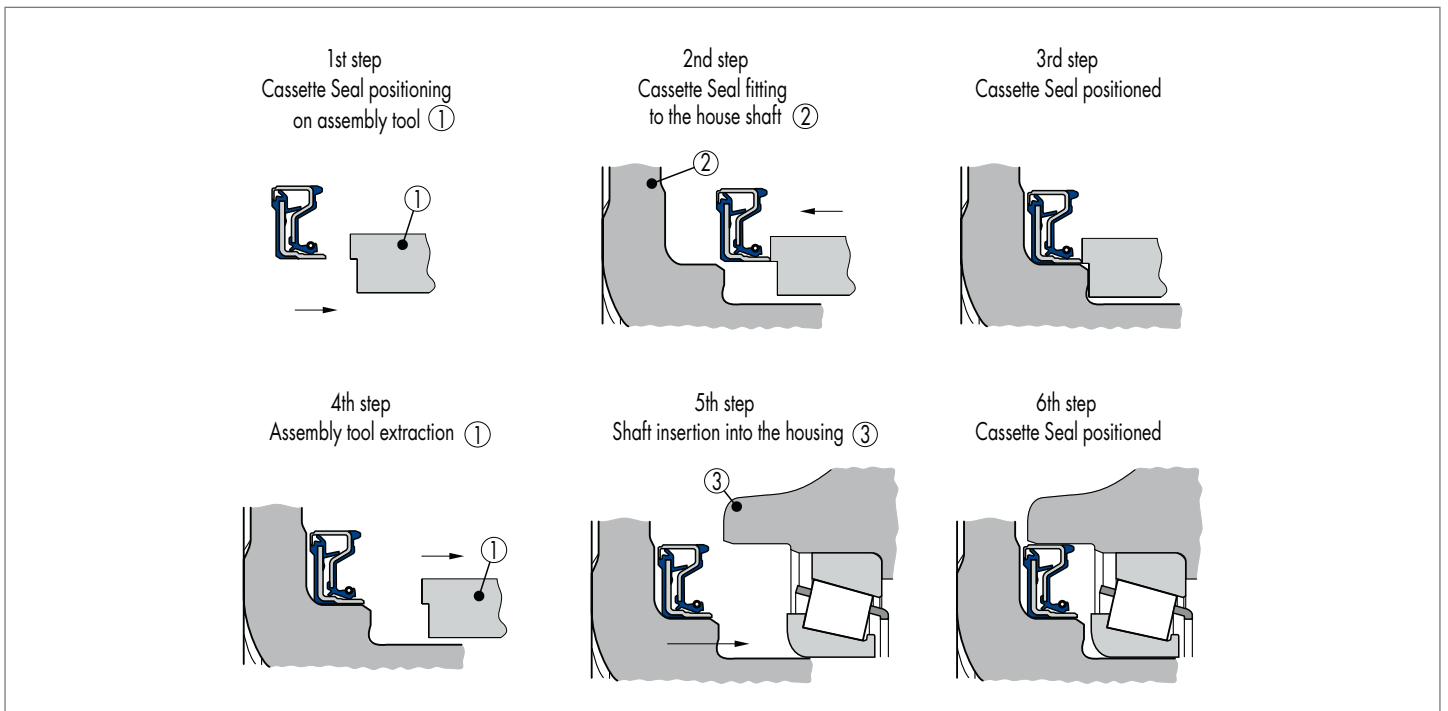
Installation of Simmerring Cassette Seal – Case B (without "bearing stop") / Montage d'une bague Simmerring Cassette Seal – Cas B (sans "arrêt sur roulement") / Montaje de Simmerring Cassette Seal – caso B (sin "bearing stop") / Montagem de retentores Cassette – Caso B (sem "encosto no rolamento")
